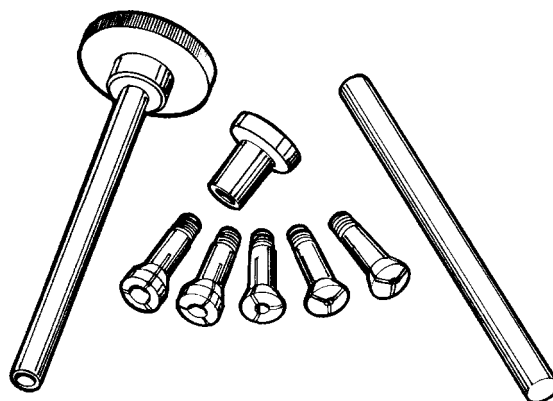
Collet Set with five collets, drawbar, adapter and knockout bar (P/N 1160, American—P/N 1178, Metric). See next page for collet sizes included with each set. A special short drawbar is available for use with the P/N 3200 indexing attachment as P/N 1168. A short drawbolt for the P/N 2045 index block set is available as P/N 11681.
